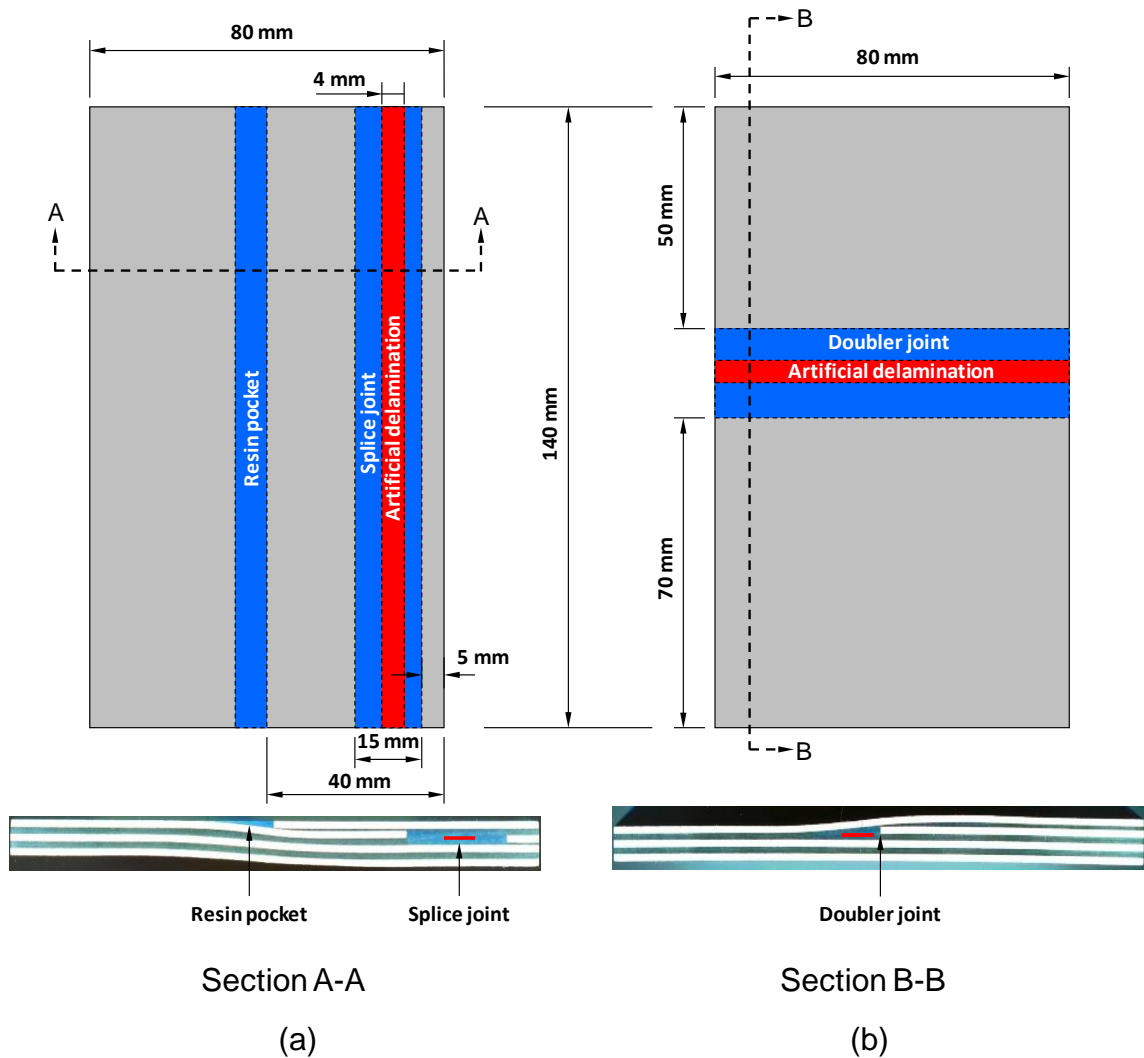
Layout of Glare[®] 4B specimens, (a) longitudinal splice and (b) transverse doubler.
